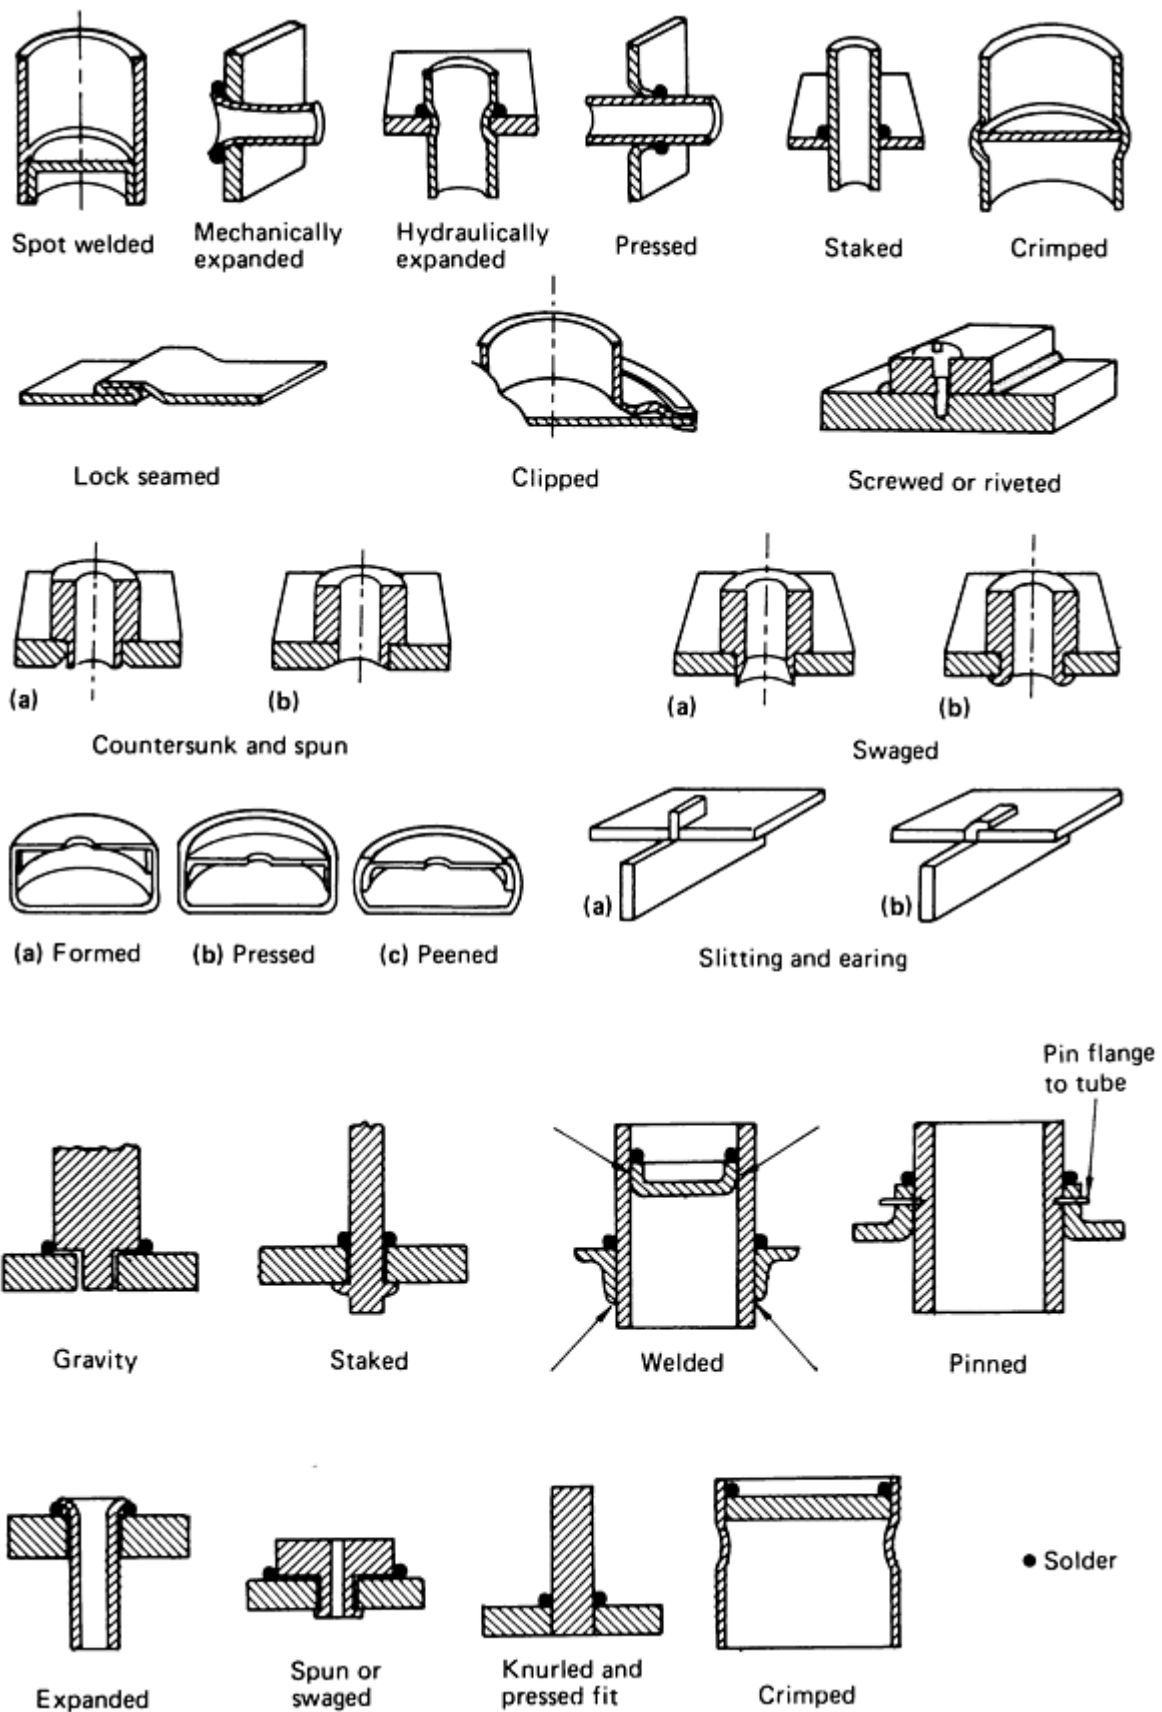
METHODS THAT CAN BE USED TO MAKE SOLDER JOINTS SELF-JIGGING. SOURCE: REF 5
